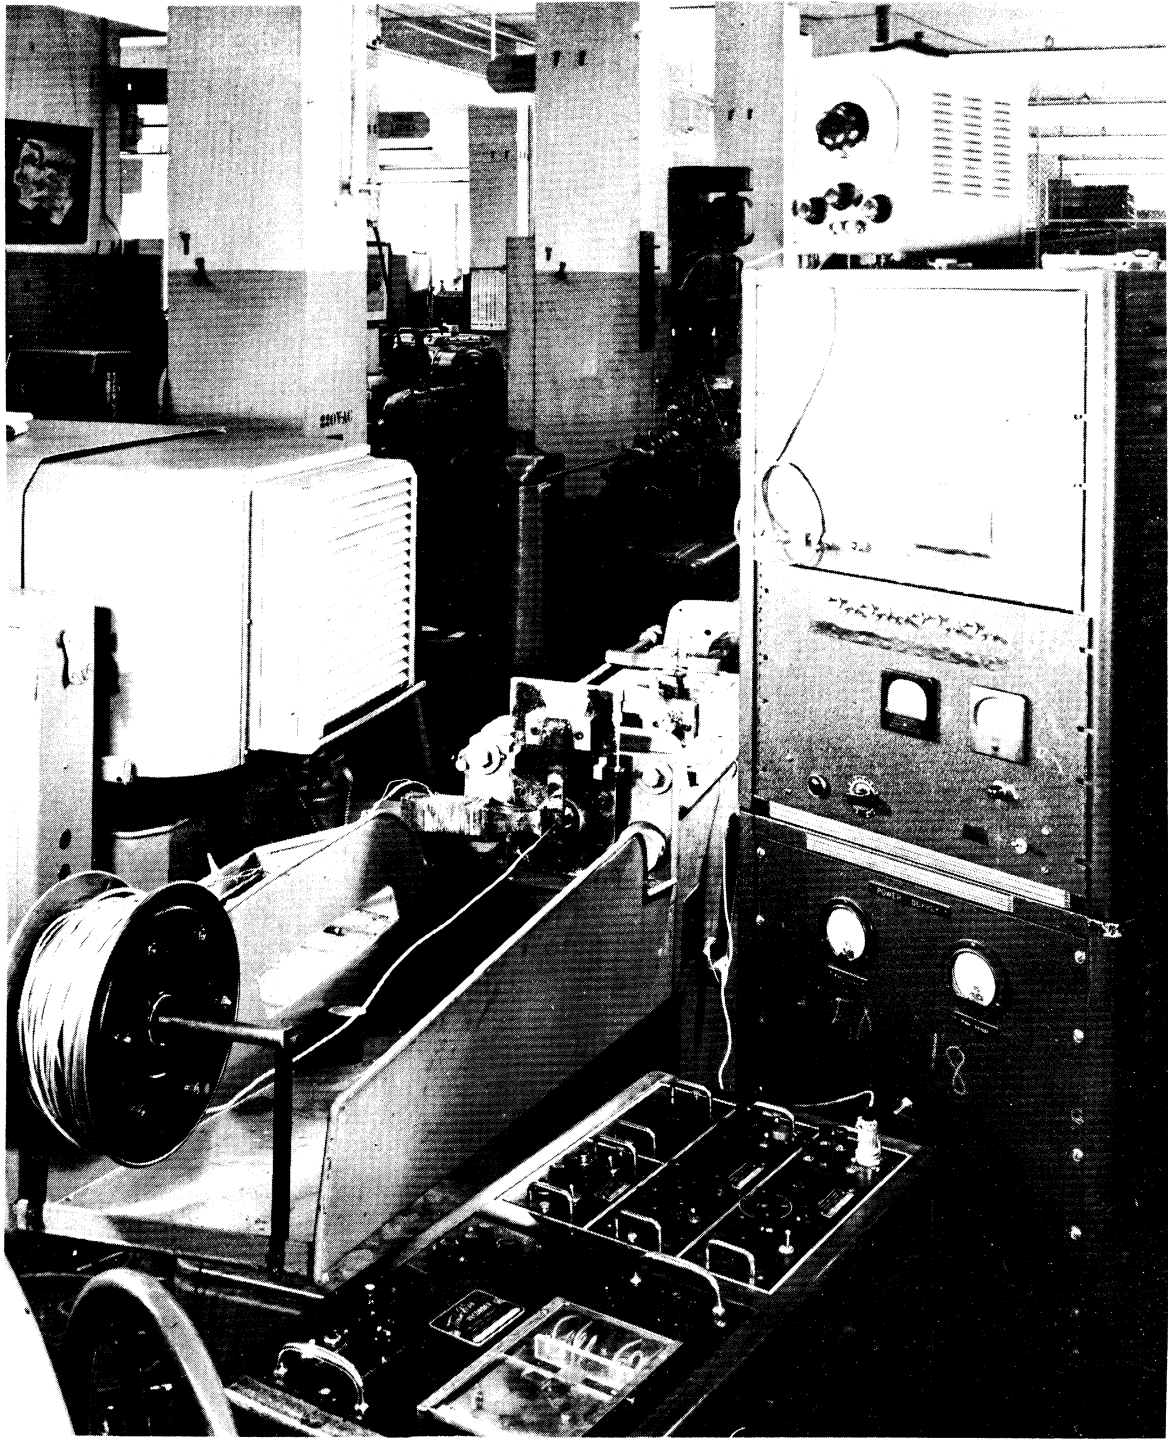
Equipment used for the wire-drawing tests. Aluminum wire is pulled through the die mounted in the horizontal broaching machine. The ultrasonic transducer is in a horizontal position and extends to the left of the die. In such a position it vibrates the die in a direction perpendicular to the wire axis. The Sanborn recorder used for force measurements is in the lower part of the picture, and the electronic generator of the high-frequency current for the transducer is directly behind the recorder.
